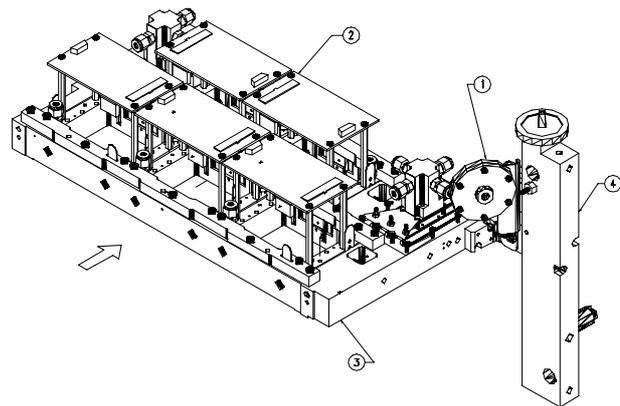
SP12.8/600 Single Pass Print Engine. 1: Last chance filter; 2: Five 2.56 inch print swaths; 3: Frame; 4: J-tube
